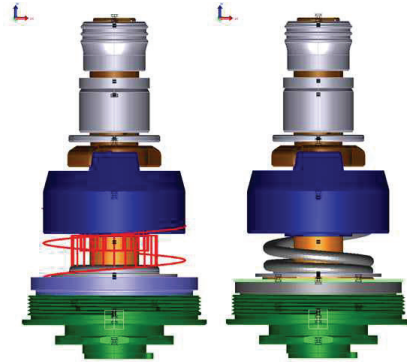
Modeling of gearbox in Impact Wrench: Rigid(left) Flexible(right)
